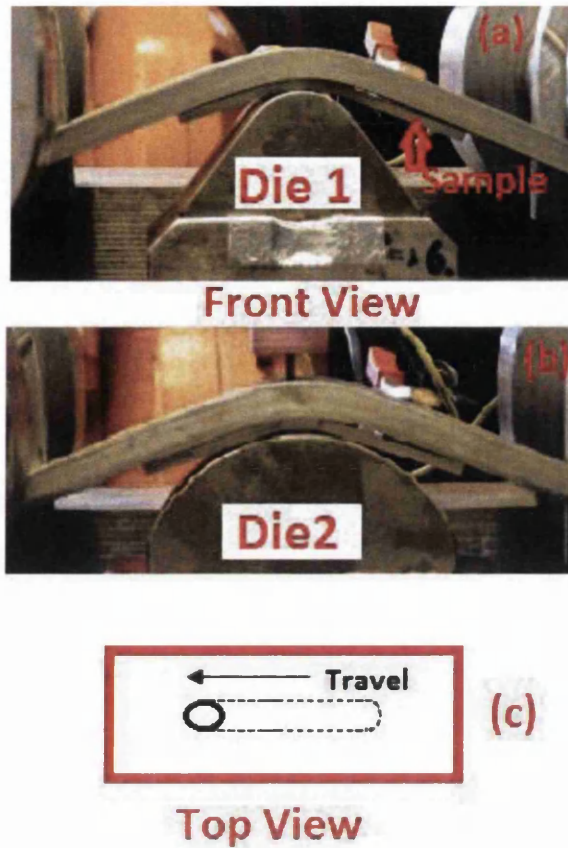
shows two different types of bending die blocks with two different radiuses. (a), (b) shows the side view with different die blocks [Note: The larger the die block radius the smaller the augmented strain] and (c) shows the specimen top view and weld travel direction.
